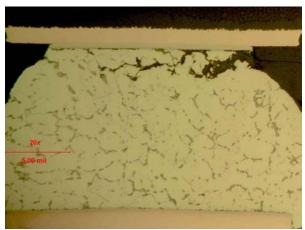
Cross-Section of a wbPBGA Solder Joint Failure for Unit 6 on Board 3, for Leg 13
